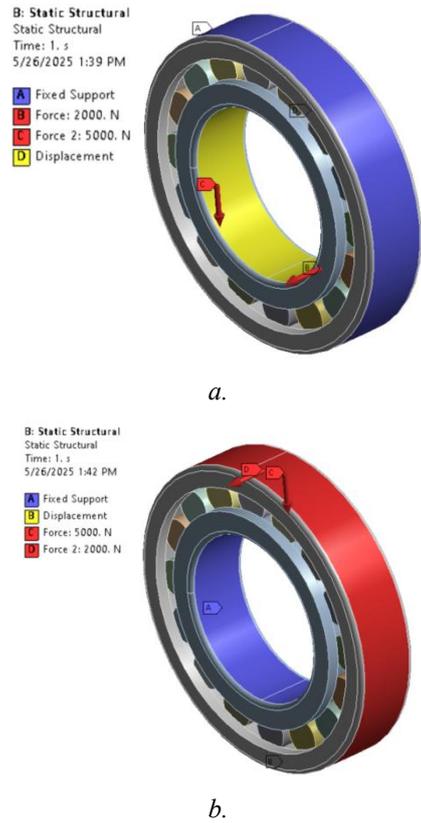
Boundary conditions for NUP 211EC bearing: a. inner ring rotating; b. outer ring rotating
